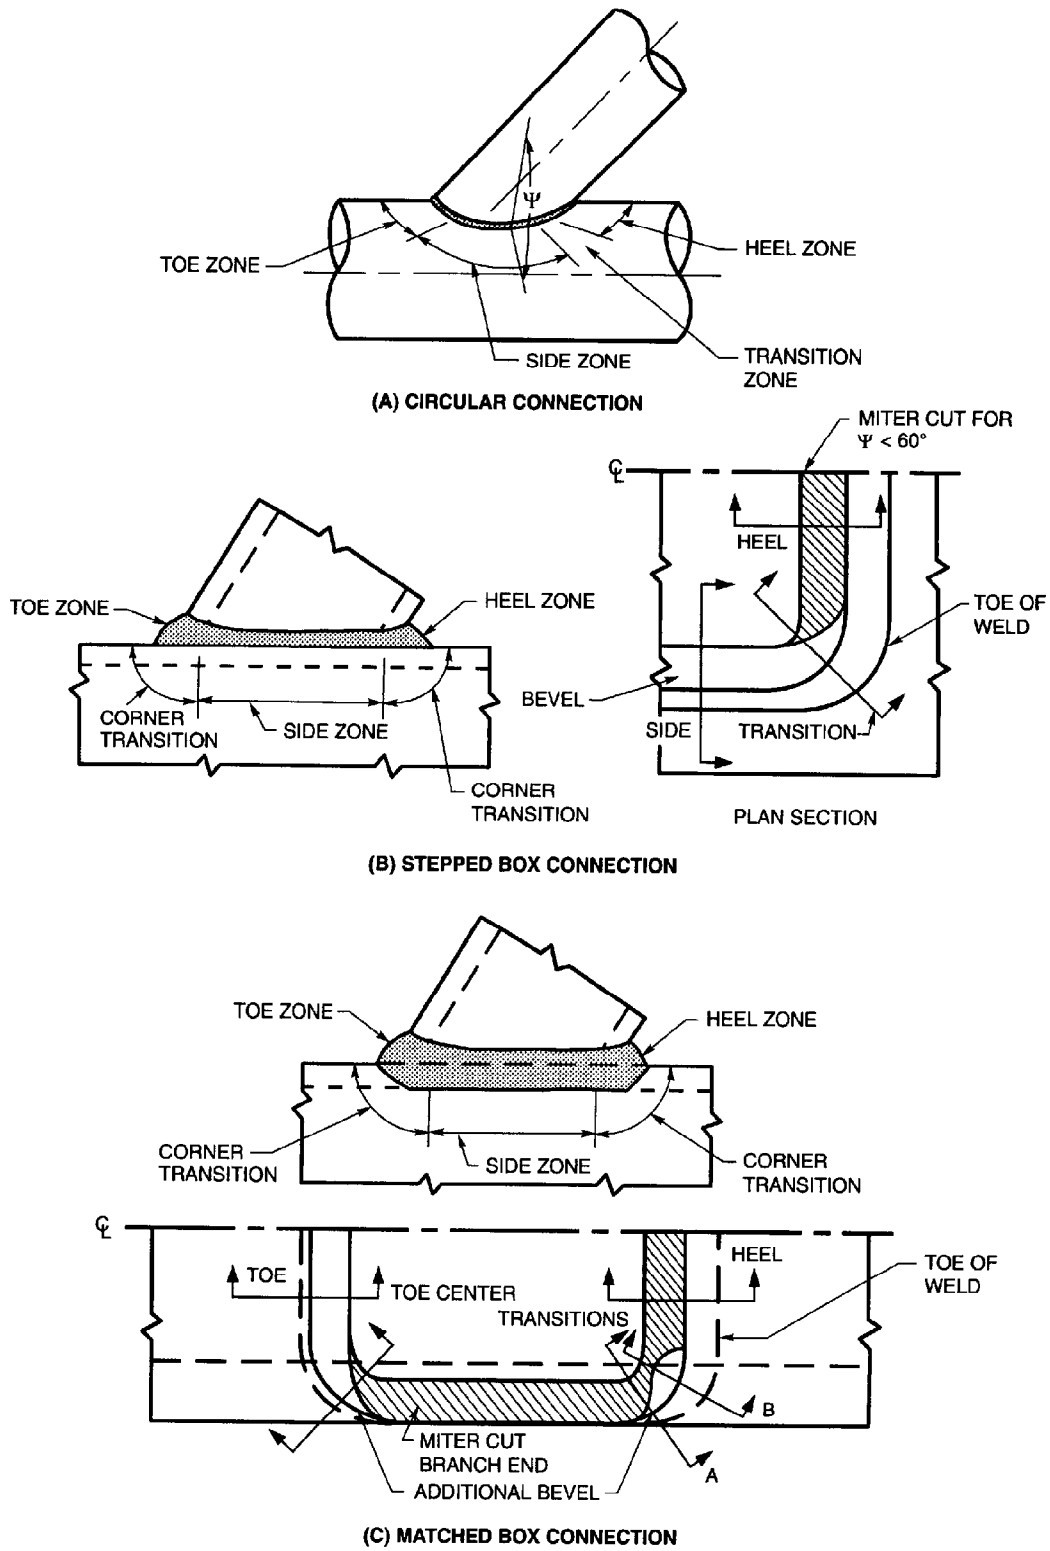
Prequalified Joint Details for PJP T-, Y-, and K-Tubular Connections (see 3.12.4)
